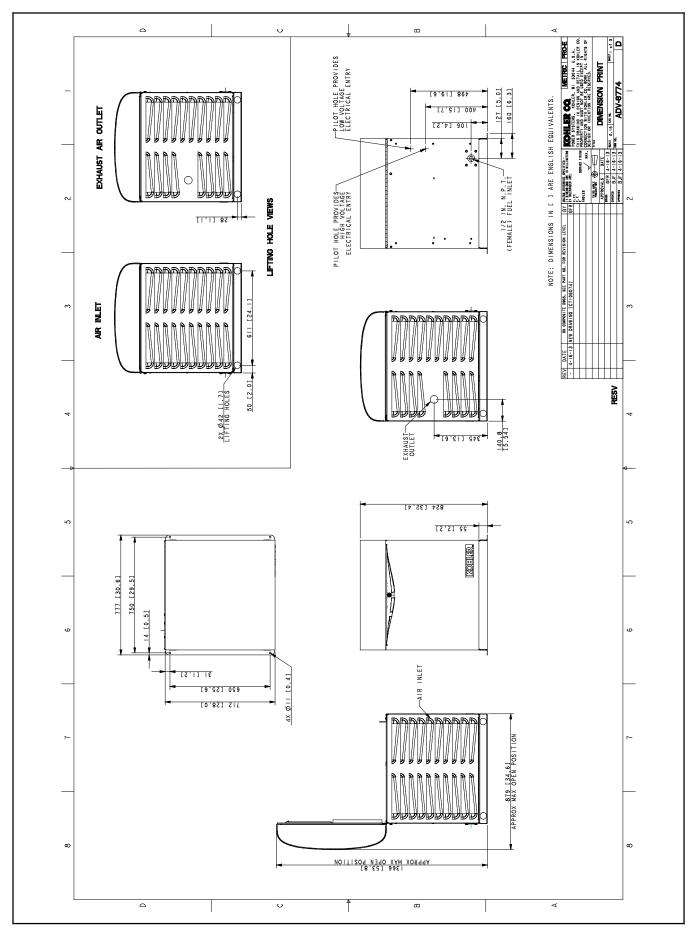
Dimension Drawing ADV-8774, Sheet 1
